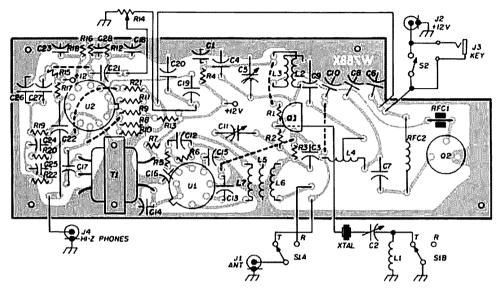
Component layout for the miniature 7-MHz transceiver. Printed circuit is shown in fig. 5.
